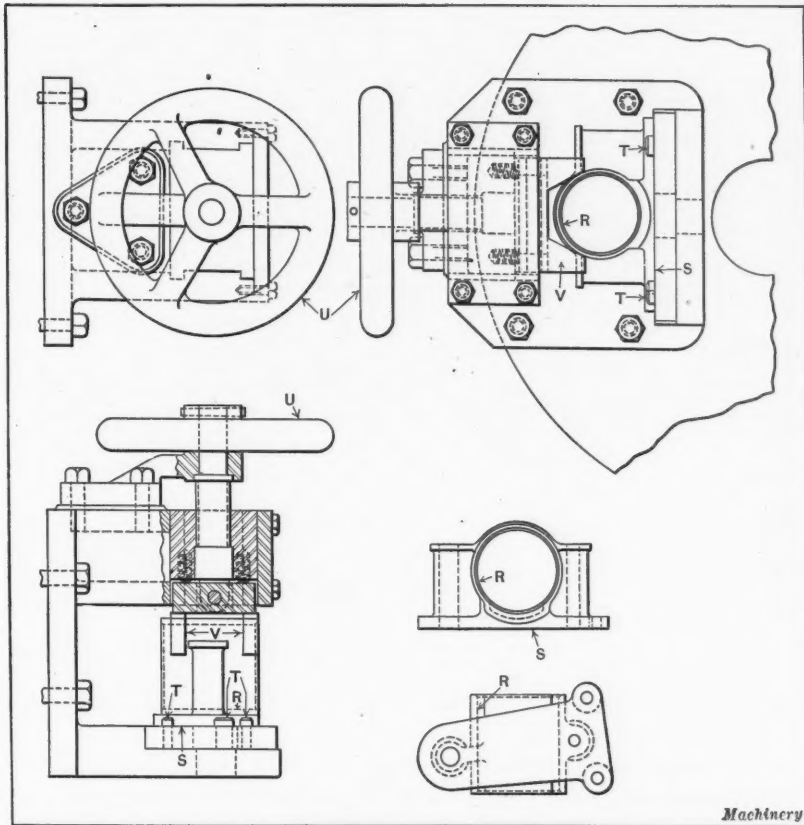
Motor Car Spring Seat to be bored and reamed at R, and Work-holding Fixture for performing this Operation
